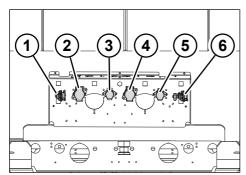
Possible arrangement of the supply and control connections on a blind coupling (standard coupling support)
